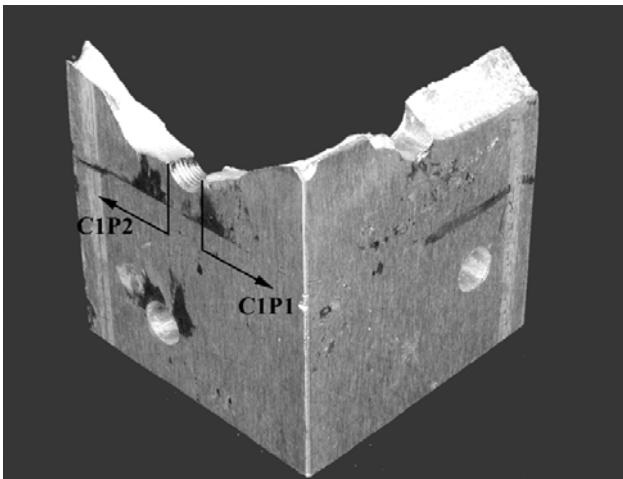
Fractured lower flange plate with fatigue cracks C1P1 and C1P2.
